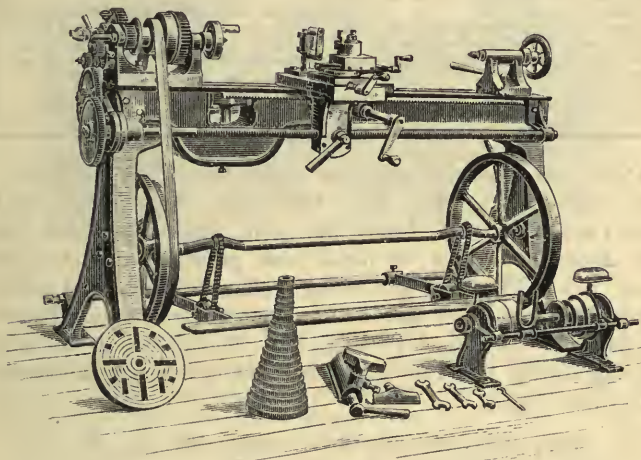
SCREW-CUTTING LATHE, 5IN. TO 6IN CENTRES
